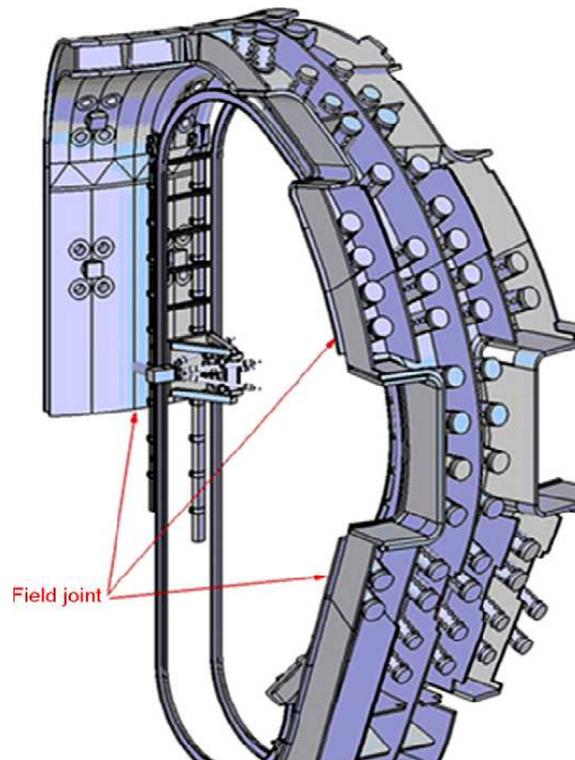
Intersector Welding Robot (IWR) in the ITER vacuum vessel sector (Pessi & al)
